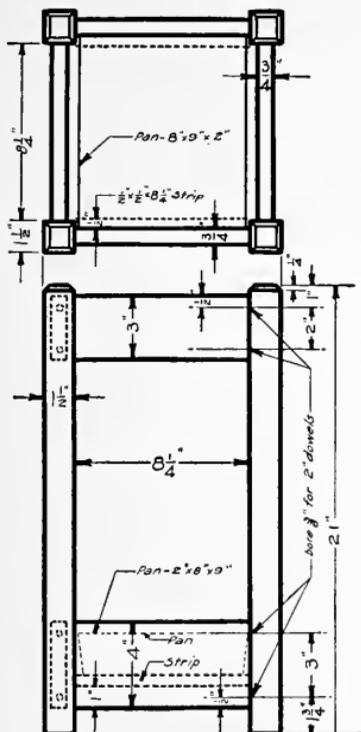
DETAILS - ONE WANTEDDETAILS - ONE WANTED
